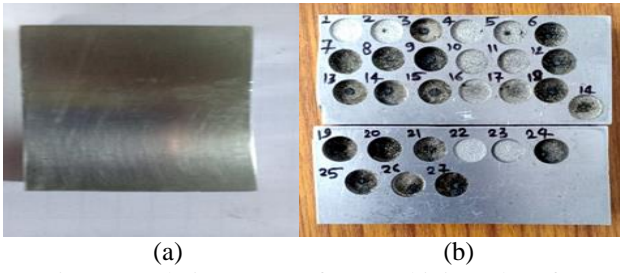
Workpiece: (a) Before machining; (b) After machining
